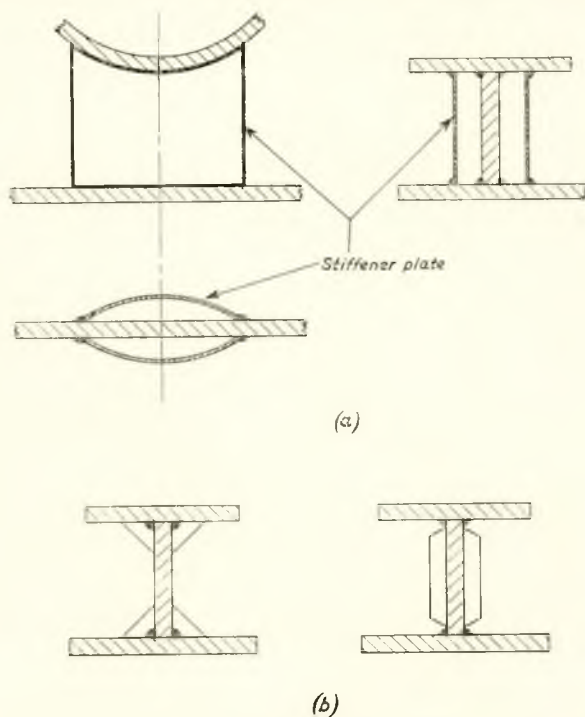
Stiffener of fabricated girders: a) inadvisable; b) preferable
